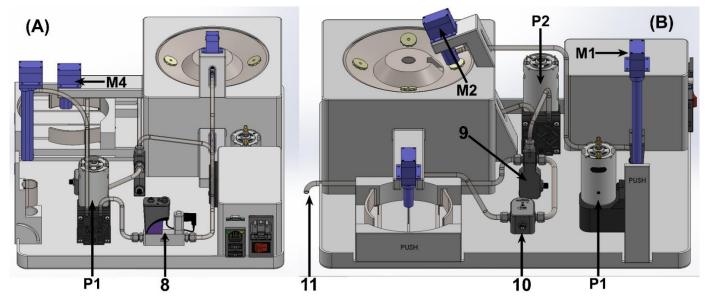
(A)Side isometric view, (B) front isometric view of MSCs extraction automatic device.
